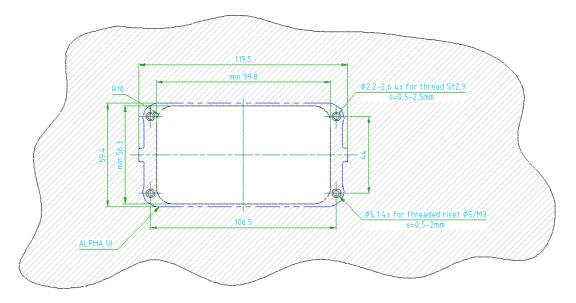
Cut-out dimensions and hole positions for Fumis Premium
